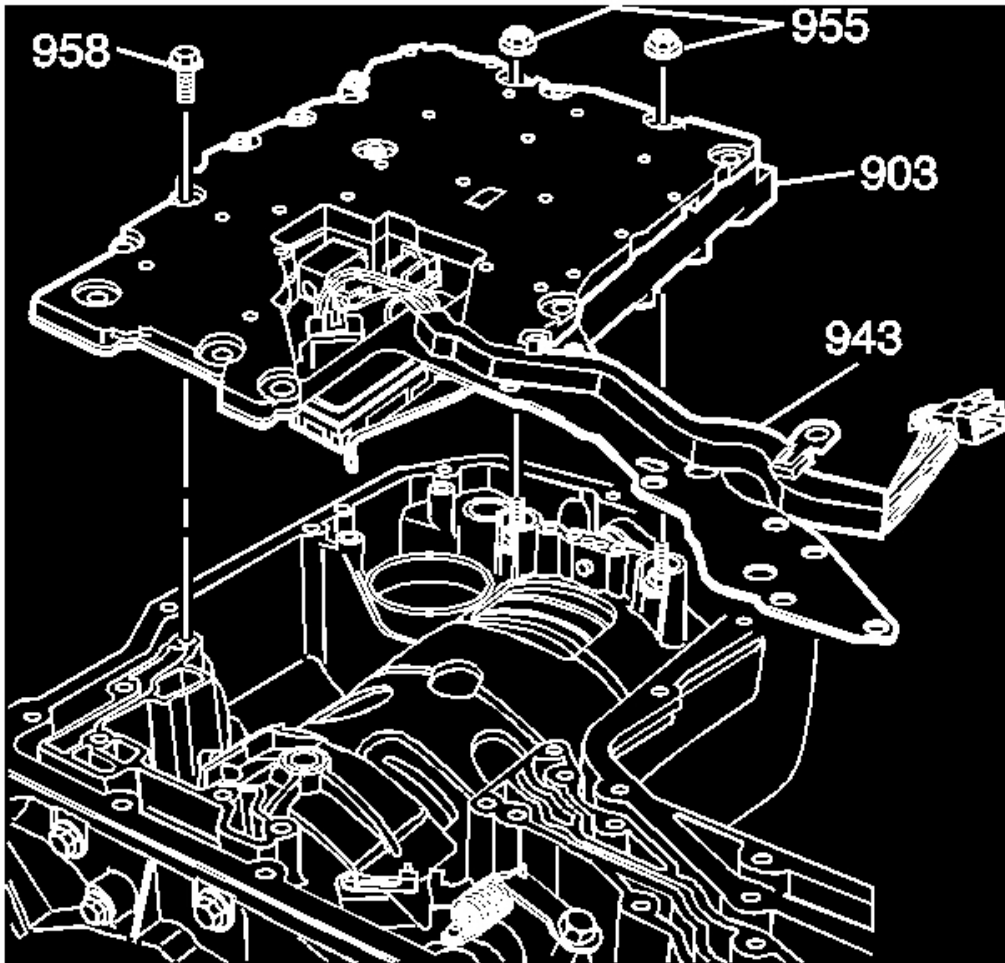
Identifying Lower Channel Plate, Control Valve Body And Accumulator Assembly, And Lower Control Valve Body Wire Harness Extension
